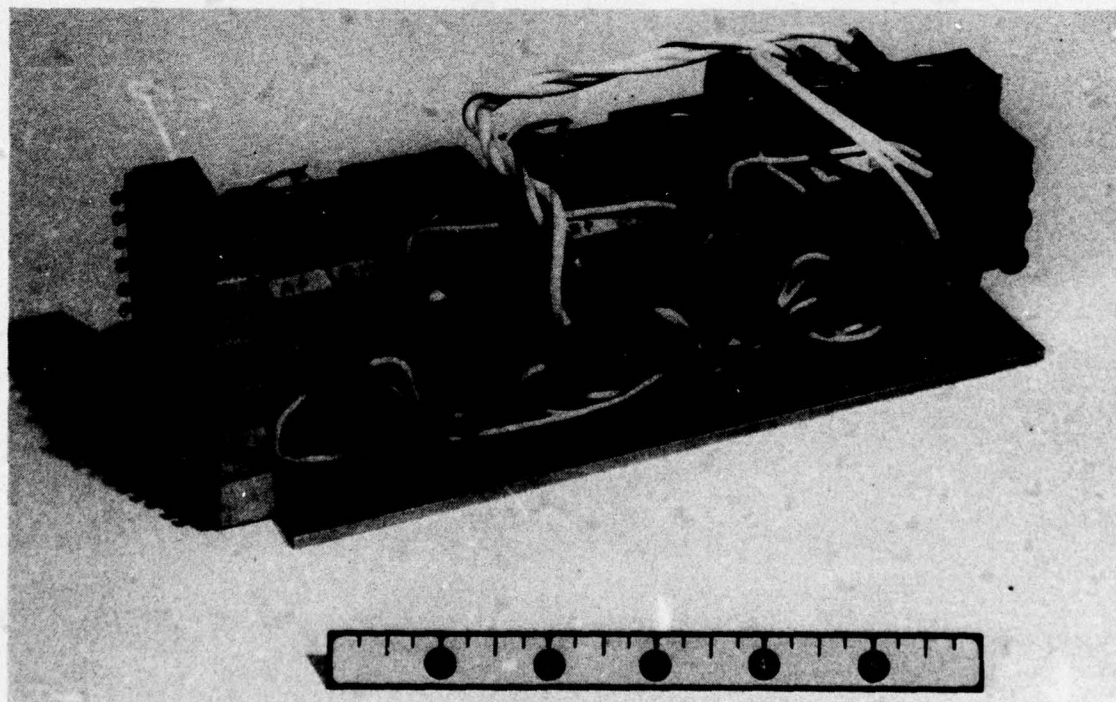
T^+ , T^- , and "Center" Thyristors Assembled on the Sink
